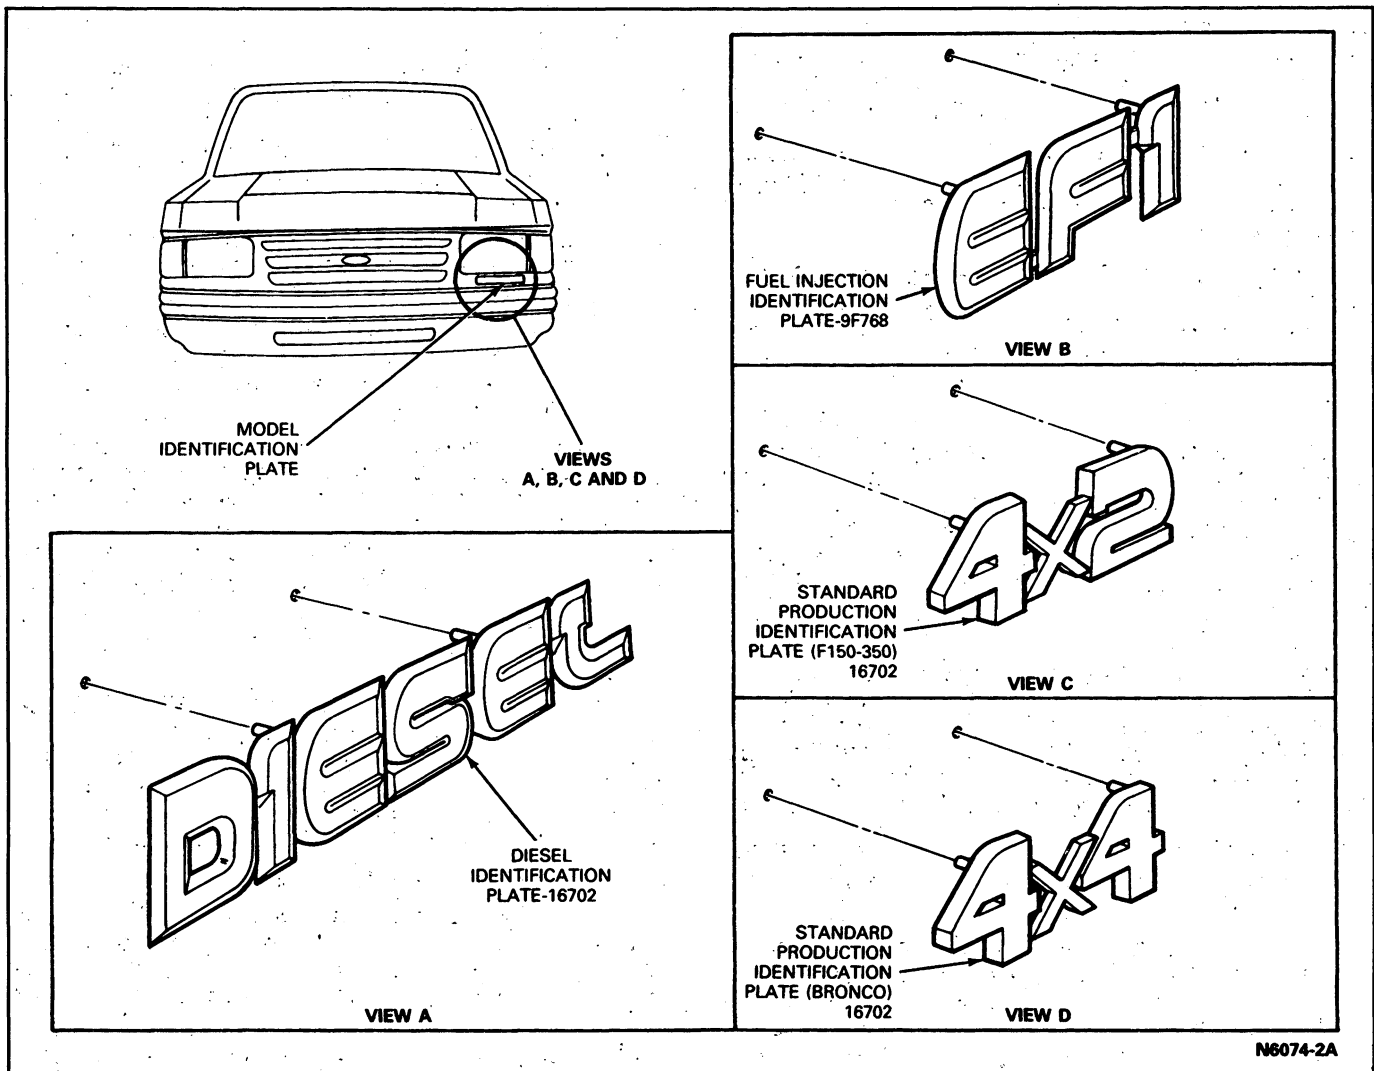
Exterior Ornamentation, Front Identification Plates—F-150—F-350, F-Super Duty and Bronco
